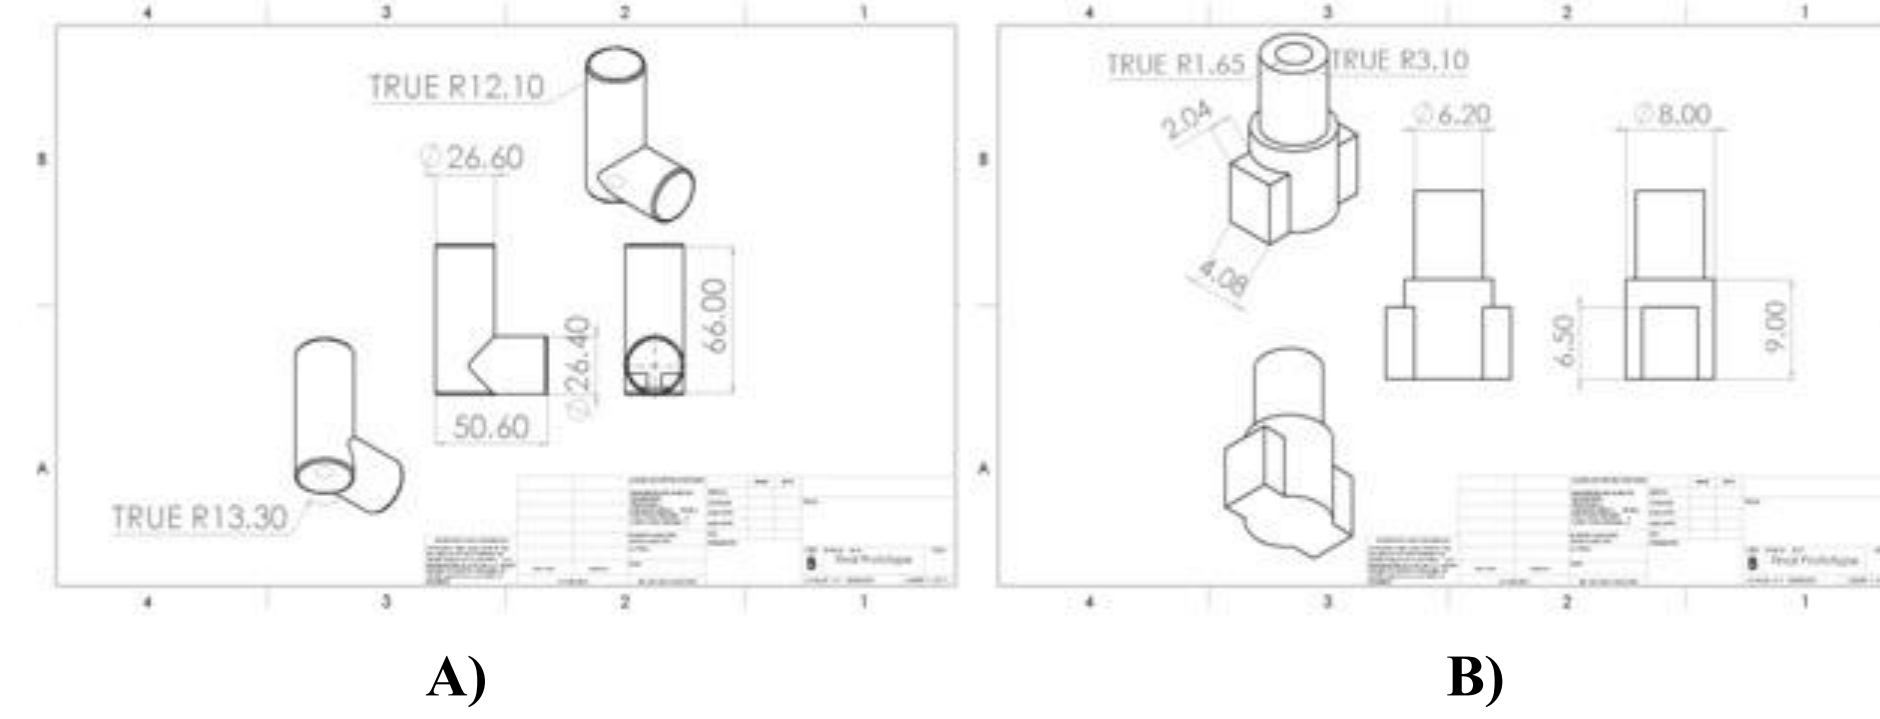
Final prototype drawings for the A) mouthpiece and B) actuator nozzle.
